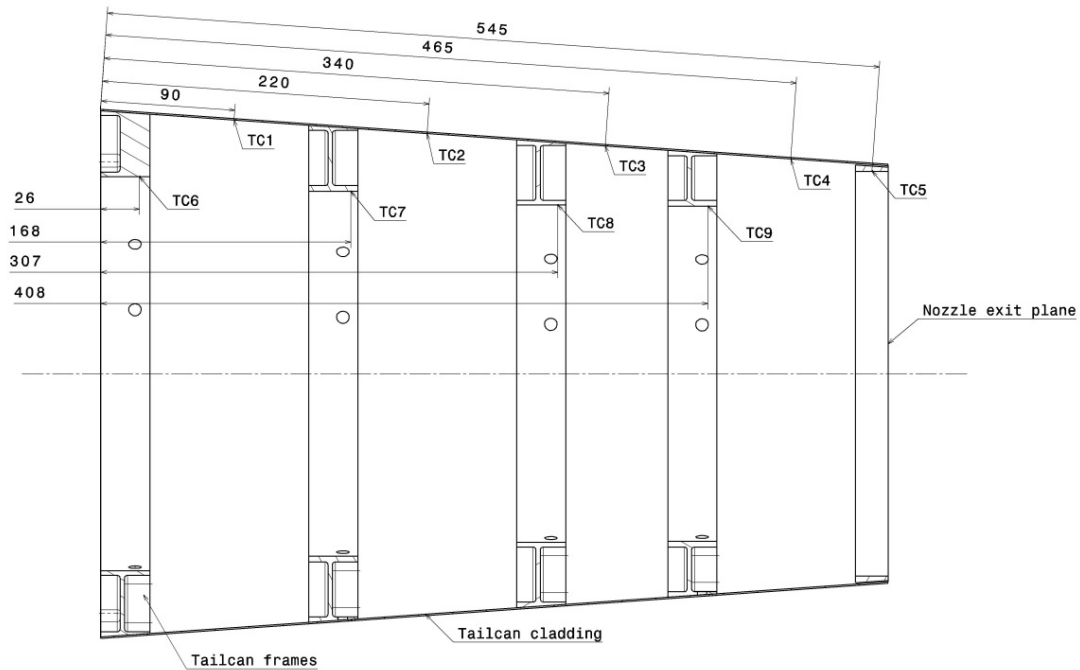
ROTEX-T tailcan thermocouple instrumentation layout
